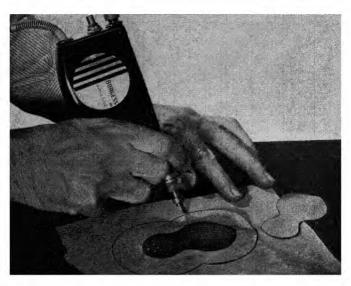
Using a vibrating knife to cut dry 0.025-inch pure-gum sheet rubber. The blade, making 7,200 cuts per minute on 60-cycle current, may be guided by a ruler or metal template. This method produces a clean-cut edge without undue drag and without causing the rubber to wrinkle,
